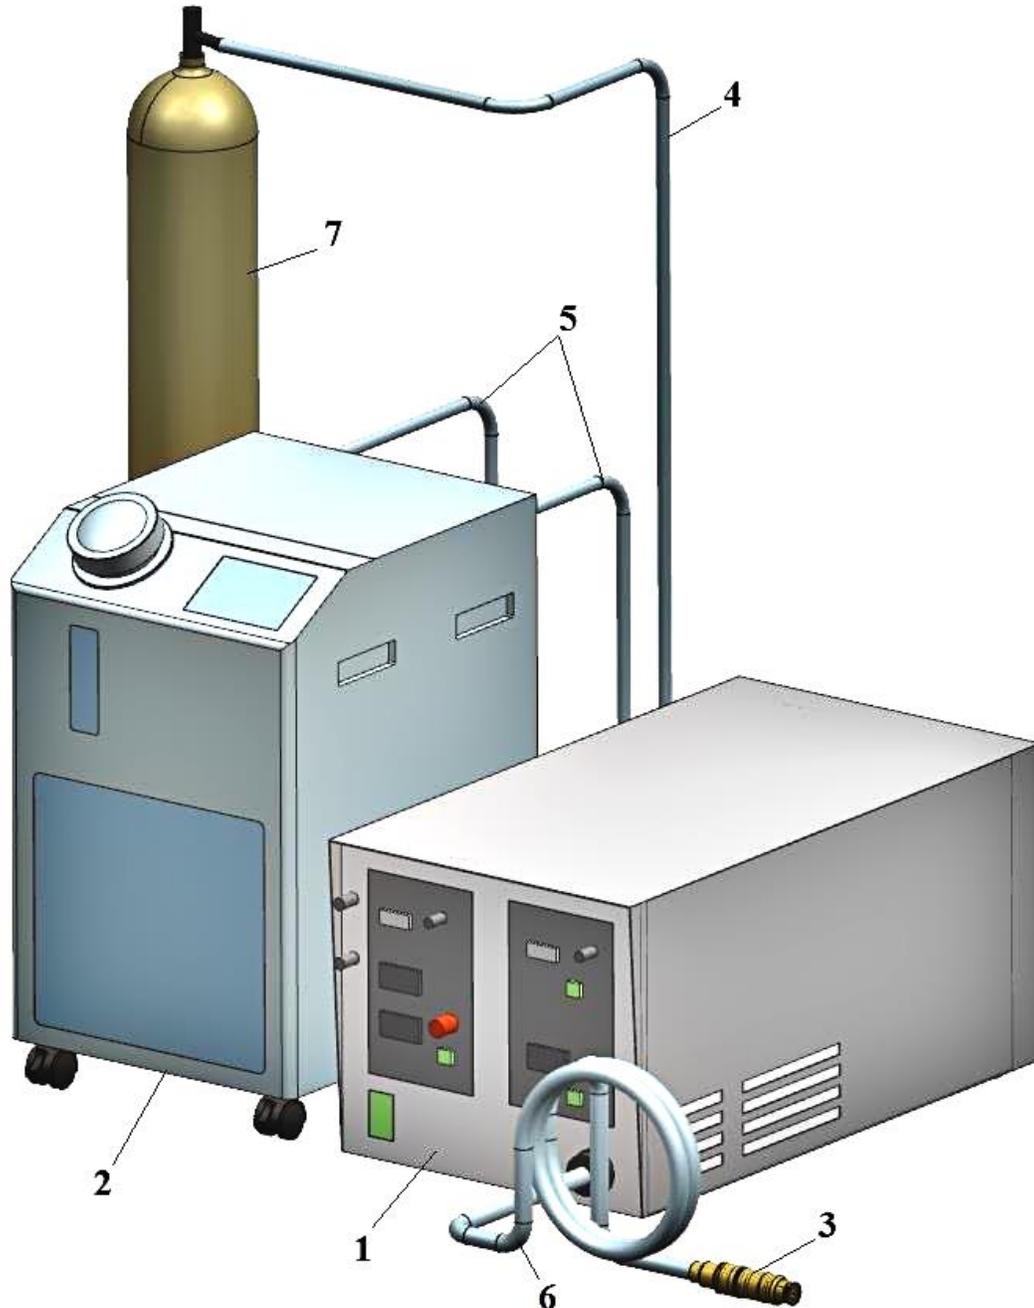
The IFPCU design: 1 – maintenance section, 2 – cooling section, 3 – micro plasma torch, 4 – gas hose, 5 – water hose, 6 –plasma torch supply hose, 7 – gas cylinder
